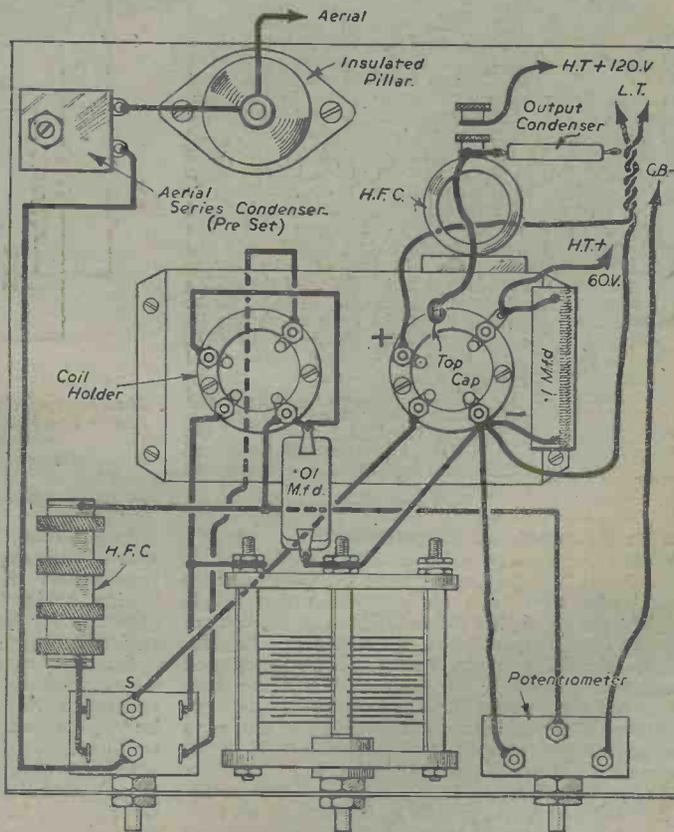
Wiring diagram and component layout of the S.W. H.F. unit. The coil and valve-holder platform allows the critical wiring to be kept short.
